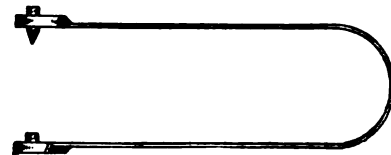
A TOOL FOR MARKING THE HOLE IN A SLIP LAY.
